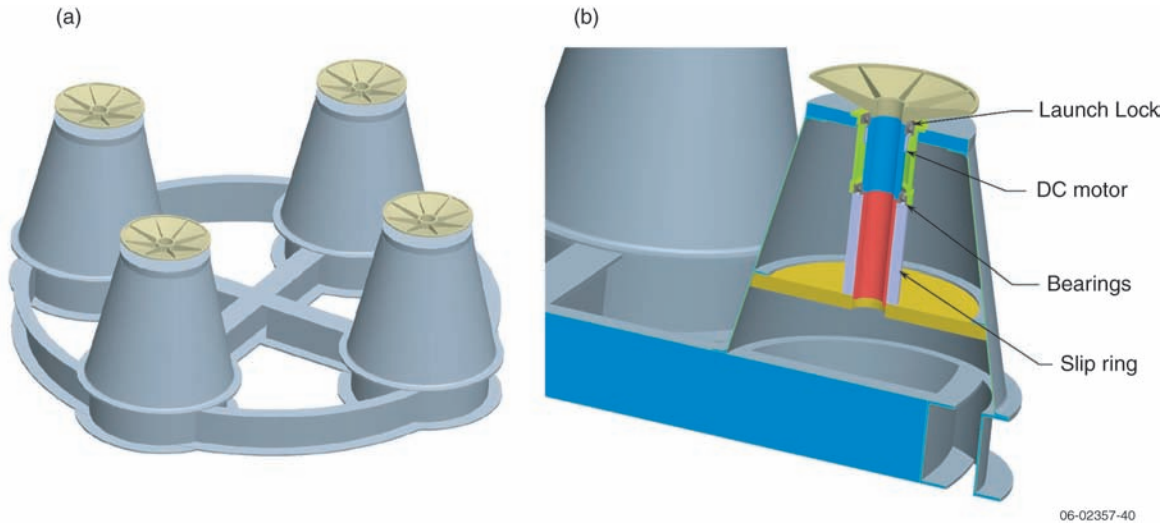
(a) Dispenser for radial configuration; (b) radial dispenser spin-up mechanism.
